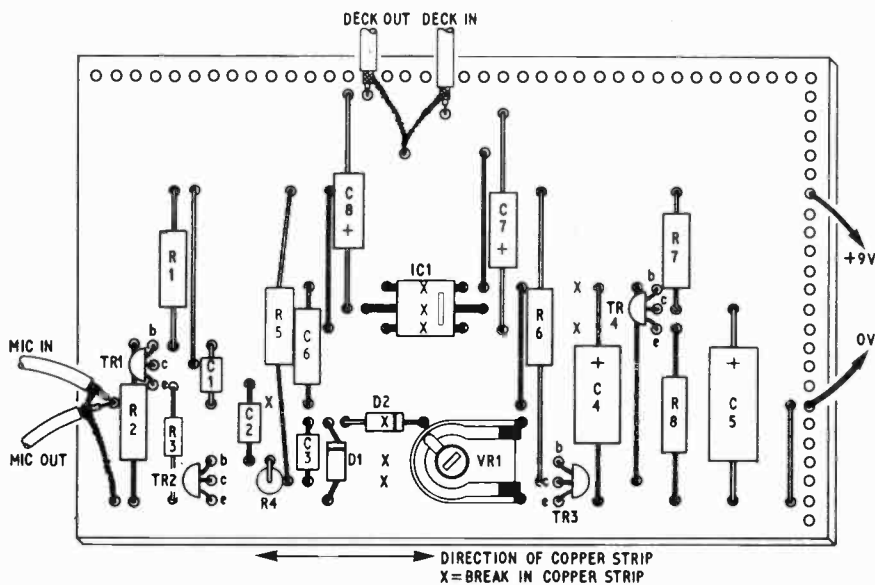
Component layout and 0.1 in track Veroboard cutting details
